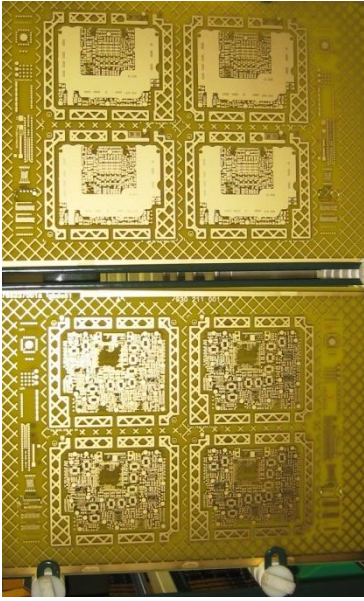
PCB samples with an ENIG-surface finish produced with the new plating line
